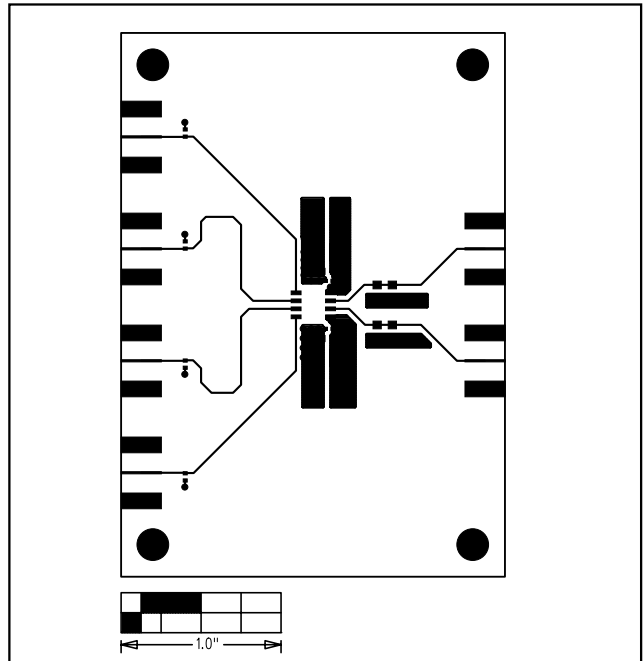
MAX9382 EV Kit PC Board Layout—Component Side
